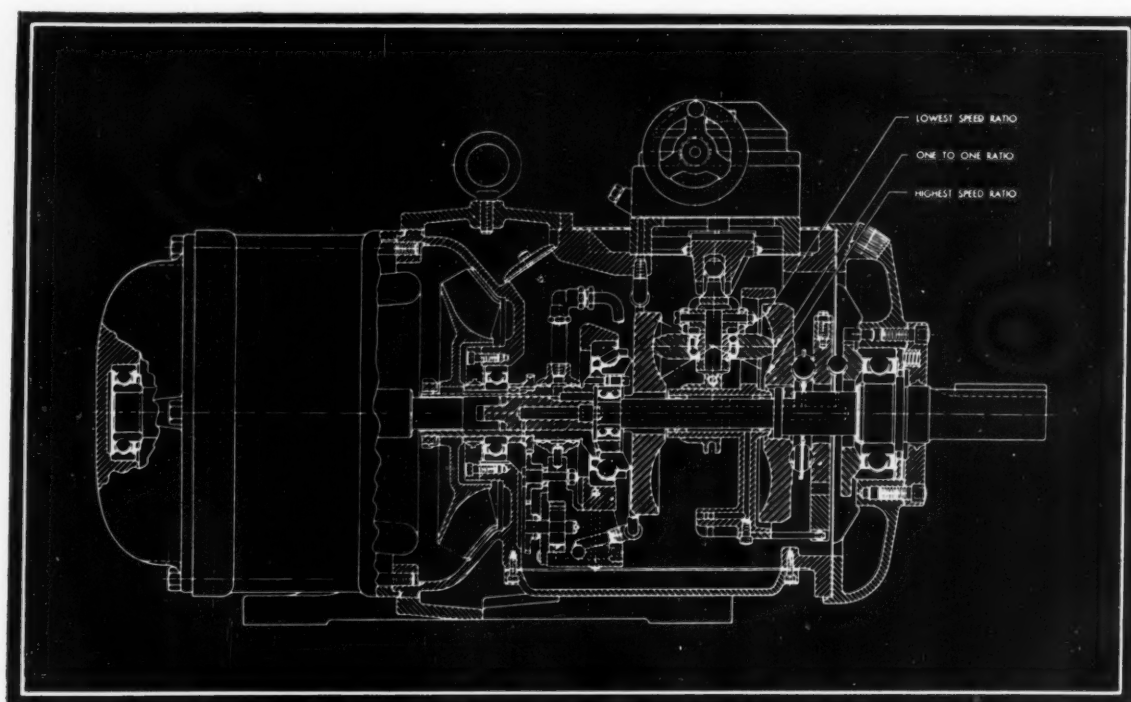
Section through variable speed power unit shows how rollers may be adjusted to any position relative to the races
